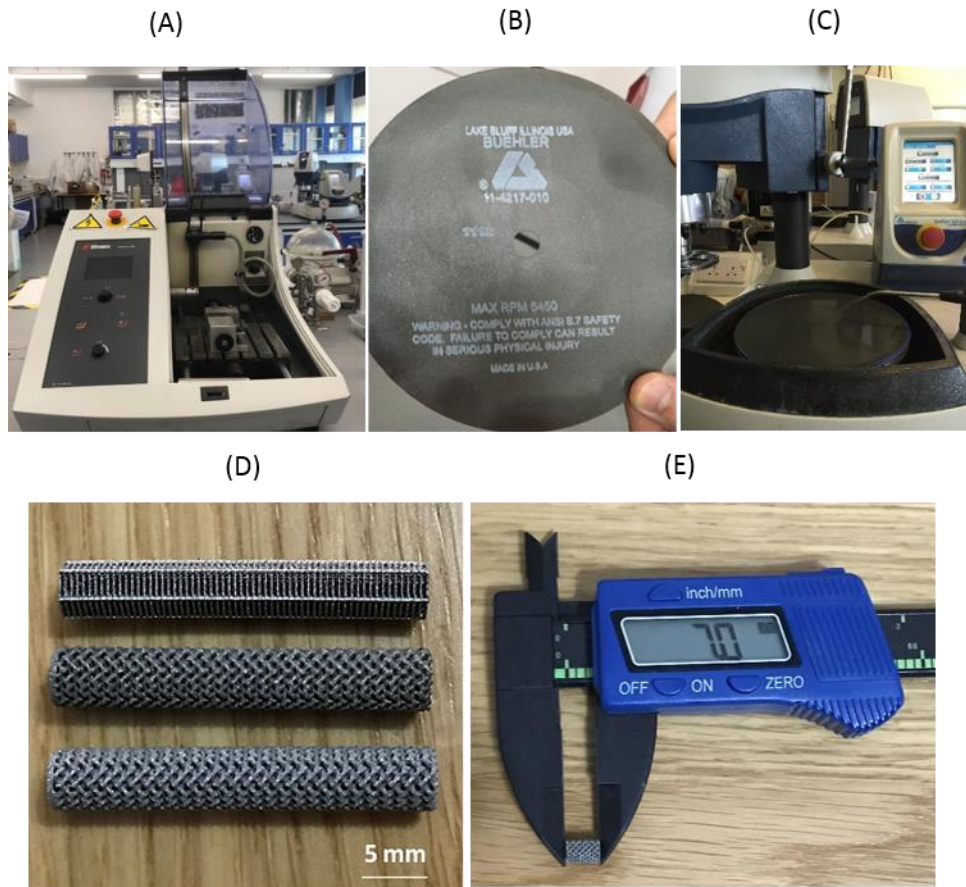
Sectioning Ti-6Al-4V lattices (A) Secotom-50 cutting machine (B) 11-4217-010 diamond cut-off wheel (C) Ecomet-250 grinder - polishing machine (D) Ti-6Al-4V lattices before cutting (E) Ti-6Al-4V lattices after cutting.
